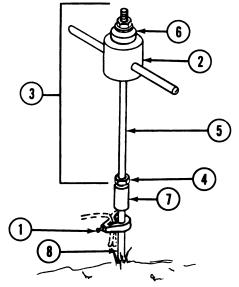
Slide Hammer Assembly (Removing Ground Rod)
